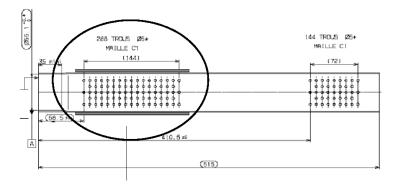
Outlet pipe. A stainless steel sleeve is located above the left perforated section with 288 holes. The other two pipe perforates contain 144 holes each.
